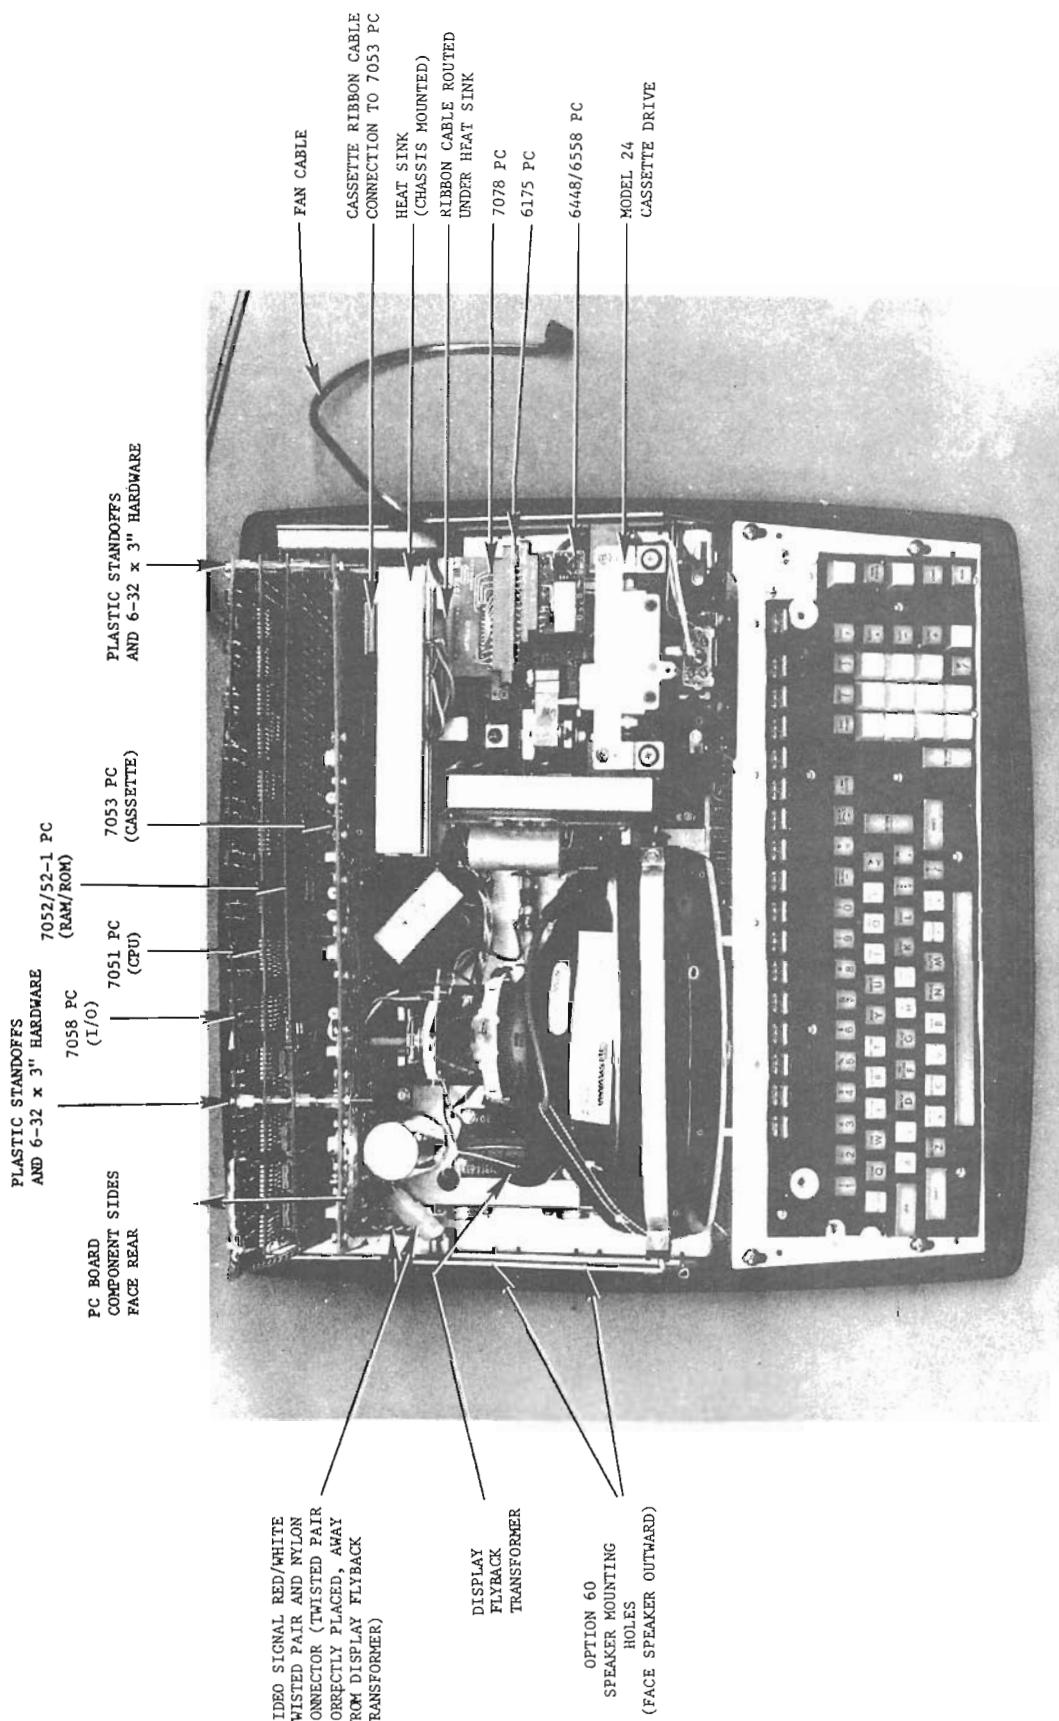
2200E; TOP VIEW/COVER REMOVED
